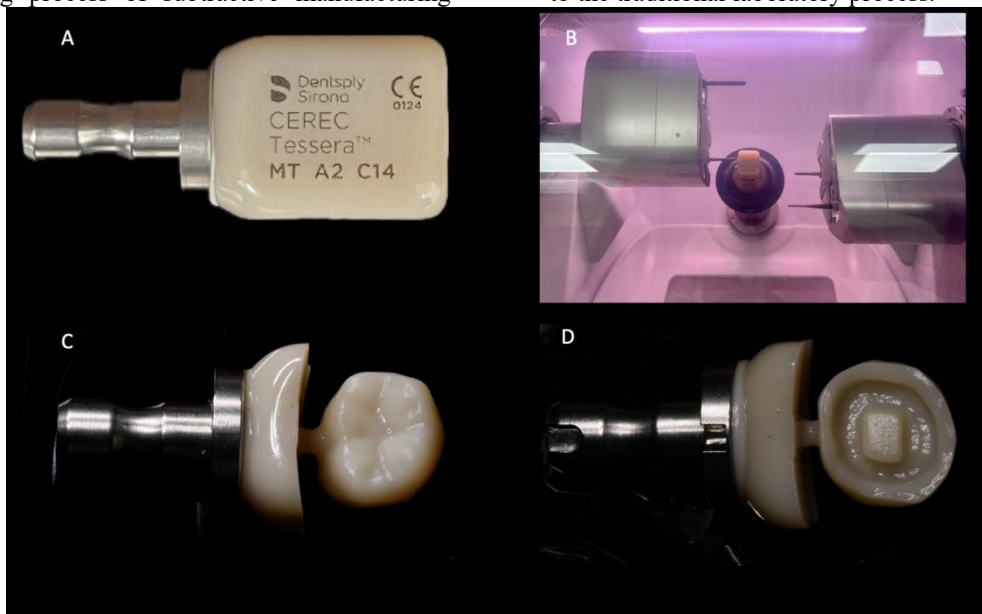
CAM workflow for fabrication of the endocrown: (a) Dentsply Tesseract CAD/CAM block; (b) Milling using the Primemill unit; (c) Milled endocrown, occlusal view; (d) Milled endocrown, intaglio surface.
